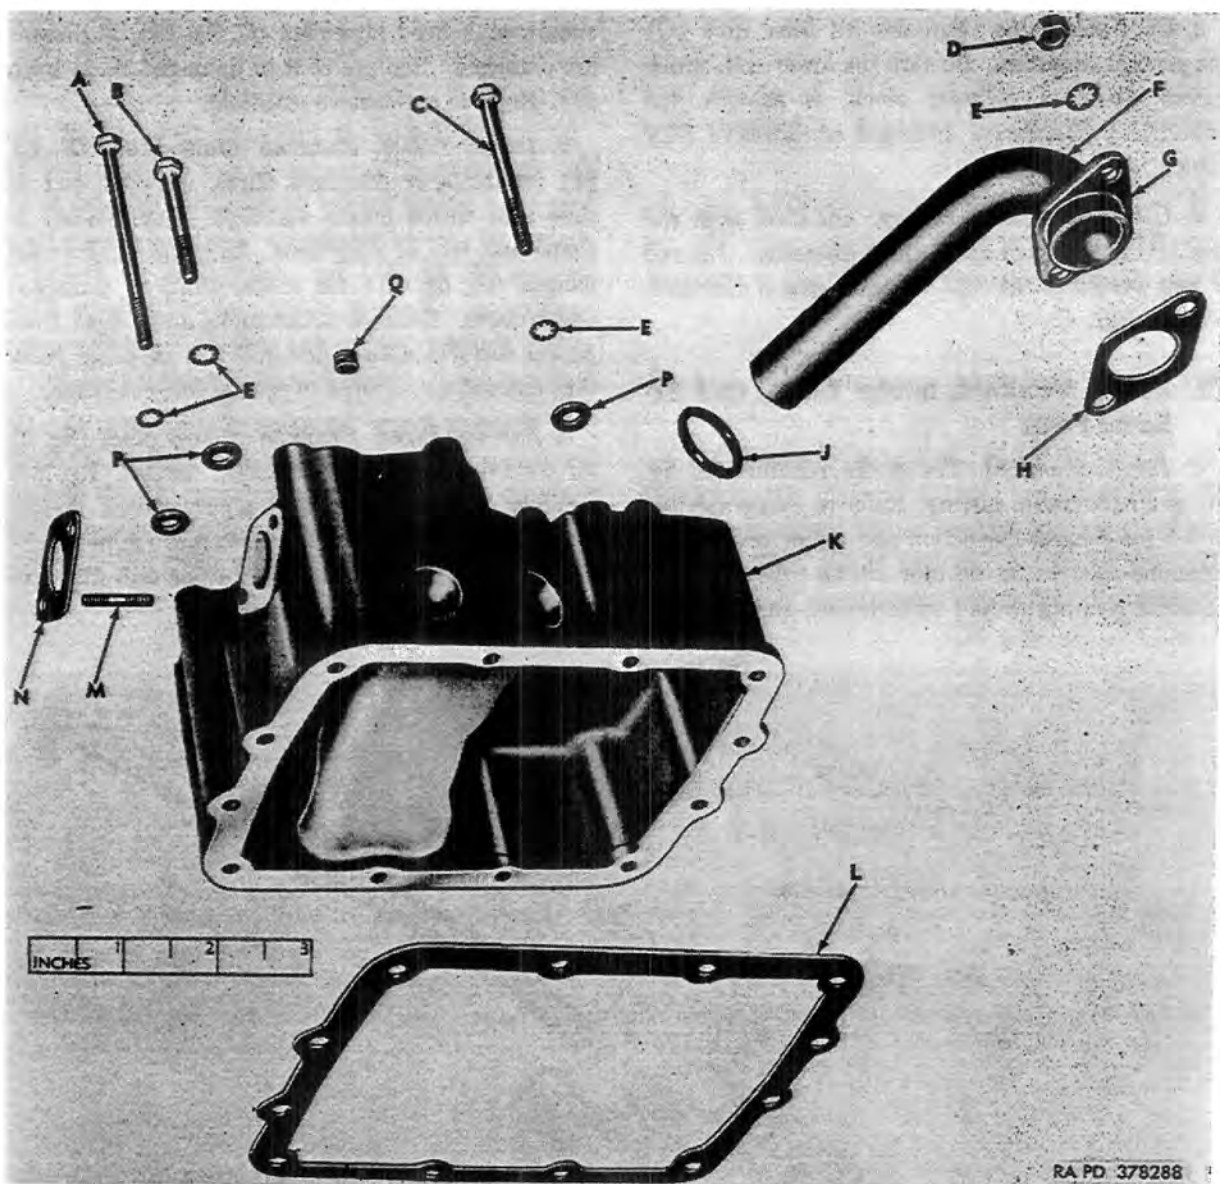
Oil pan, oil strainer screen, and oil filler tube—Exploded view.
